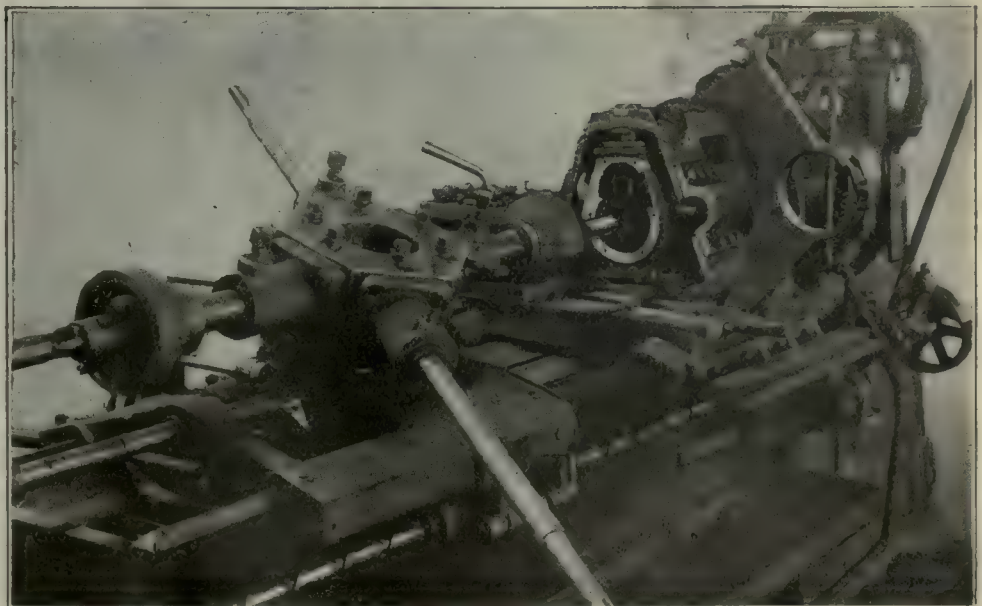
TURRET-LATHE OPERATION ON CRANKCASE
